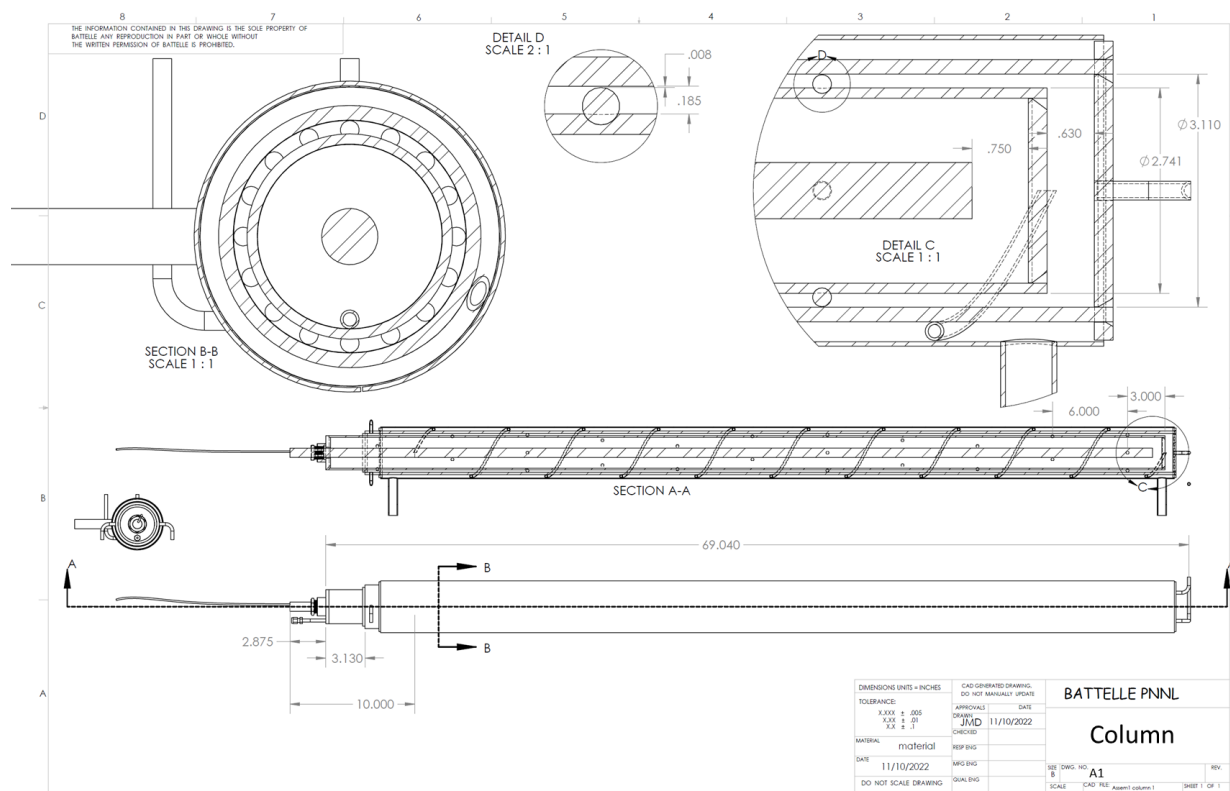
Engineering drawing of the column design. All dimensions are in inches.
